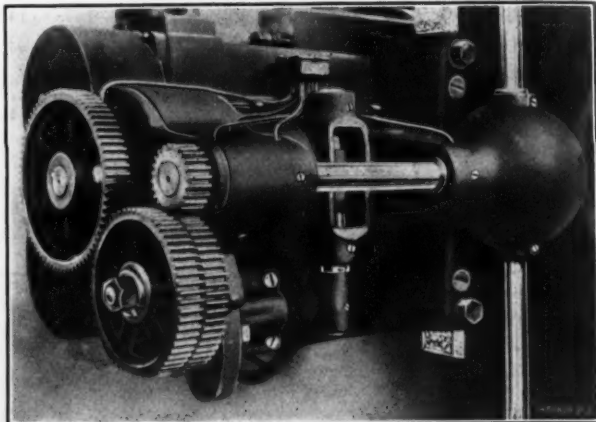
Detail Showing the Additional Gears Necessary When the Thread Cutting Attachment is Used.
